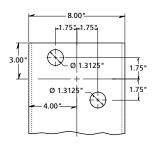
DETAIL POST ASSEMBLY 6 x 4 SIDE ELEVATION Q2
